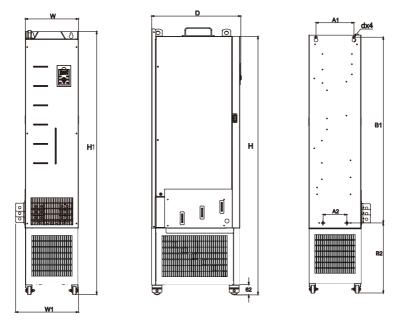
Outline and mounting dimensions of models with sheet metal structure (LS680T200G-C to LS680T400G-C)
